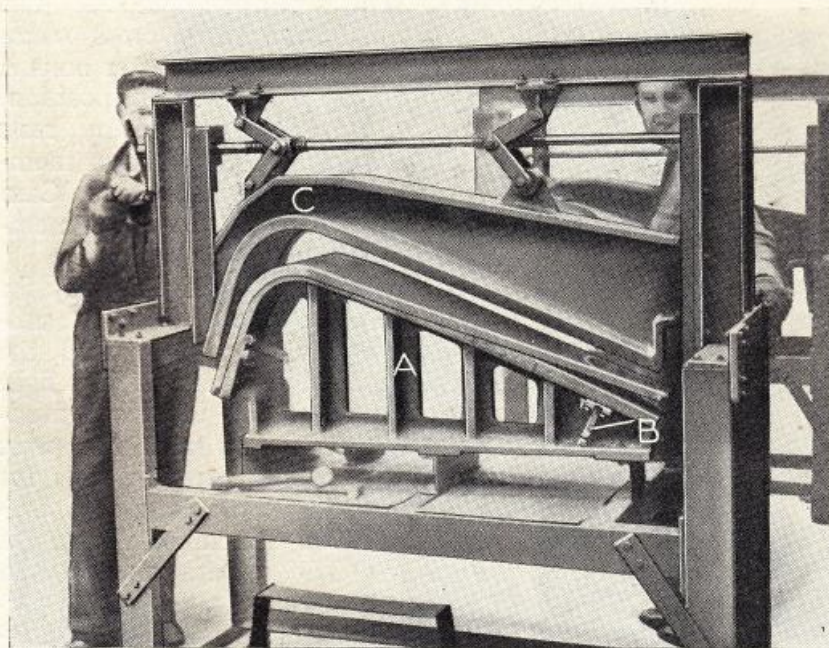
Fixture for Holding one of the Front Mudguards while the Flanges are produced by Hammering. The Upper Tool is Operated by a Handle through a system of Toggle Levers
